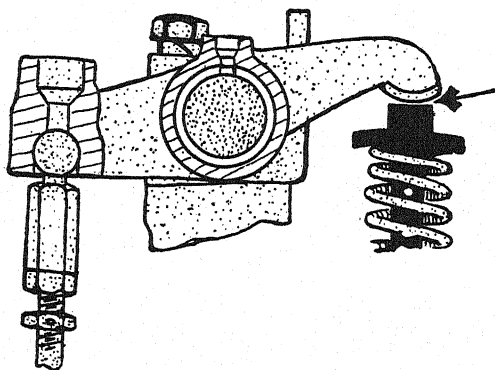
Adjustment of valve-stem clearance on valve-in-head motor. (Clearance is measured at point indicated by arrow.)
